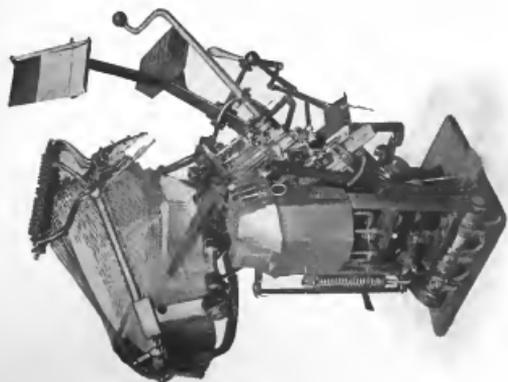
Typograph, disseminating position, upper part filled back; front view.
